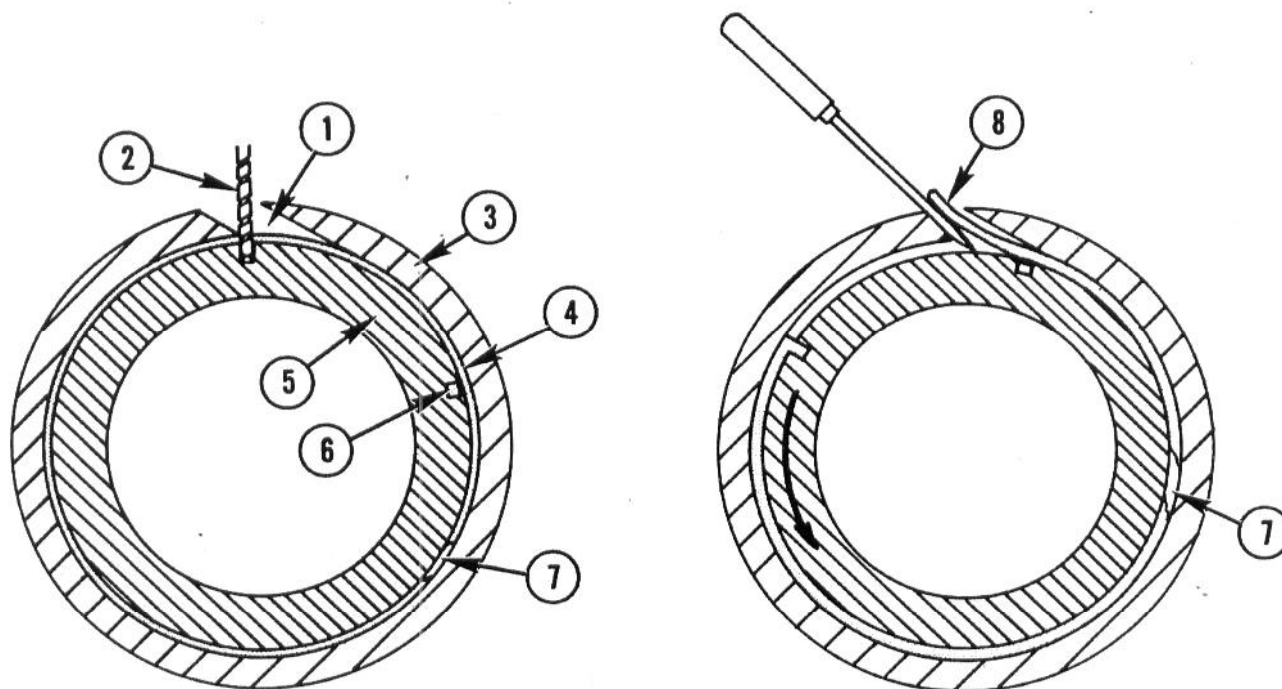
Drilling Through and Starting Wire Retaining Ring for Removal of Broken Ring
